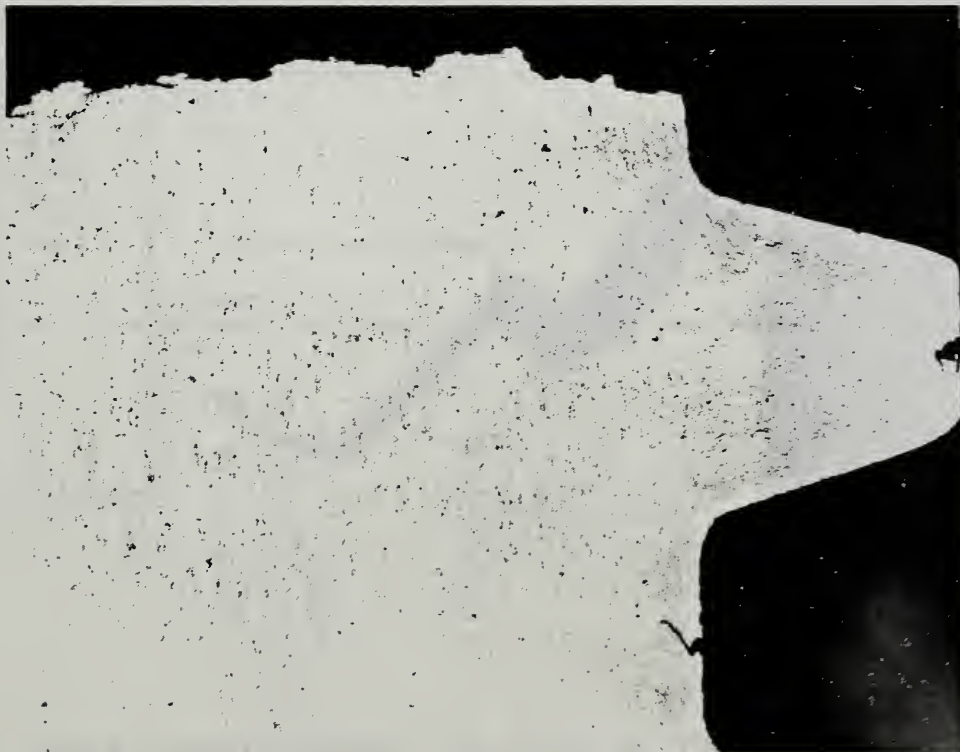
Fracture profile of jack rod, left, first thread adjacent to fracture (Sample NBS 11-2) (x 9)
